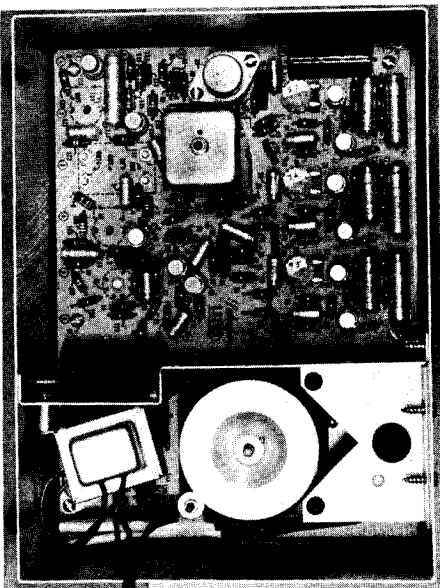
An etched circuit board inside the Unit holds all electronic components.
